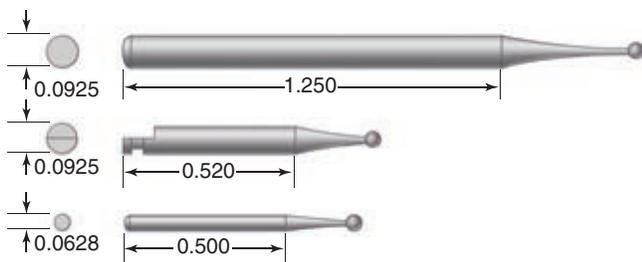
Characteristics and typical dimensions (in inches) of three common instrument shank designs for straight handpiece (A), latch-angle handpiece (B), and friction-grip angle handpiece type (C).
